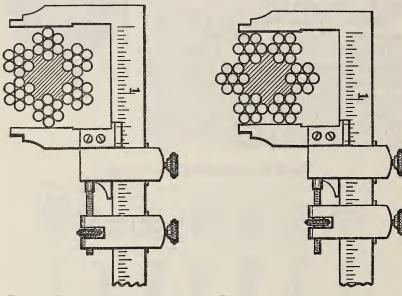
Correct way to measure the diameter of wire rope. Use a machinist's caliper square.
